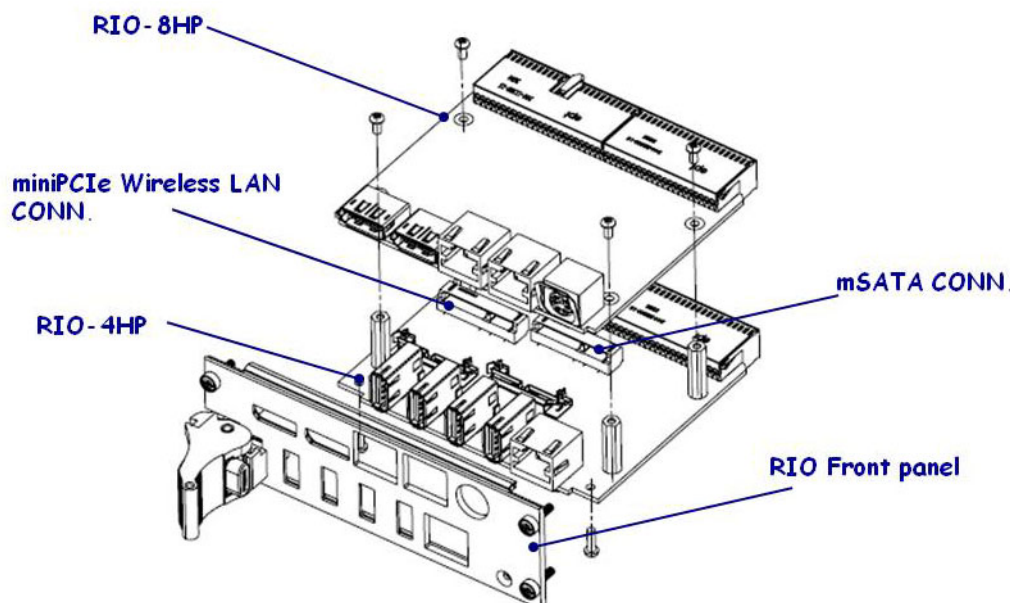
MIC-3526 RIO for MIC-3328 8HP assembly
